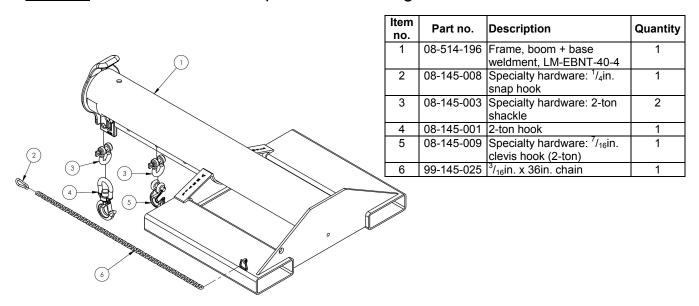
F: LMS-EBNT-40-6 Exploded Parts Diagram & Bill of Materials
